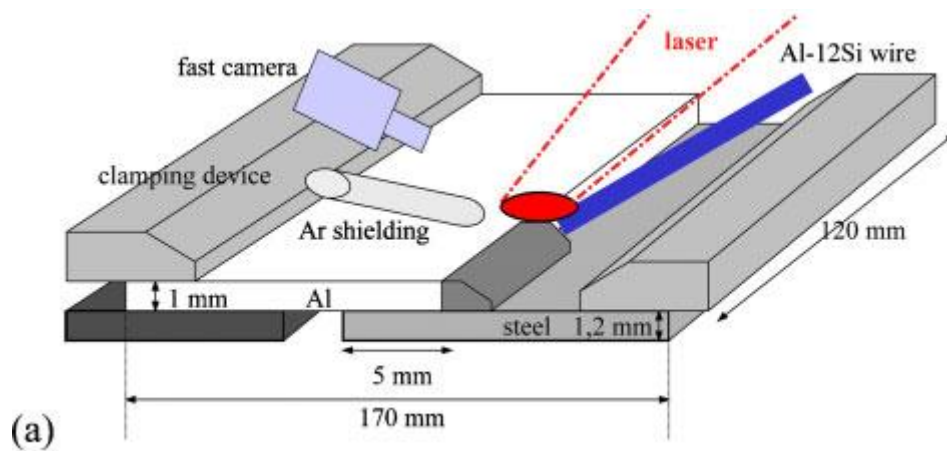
Schematic setup of Filler metal Laser Welding in Lap Configuration [23]
